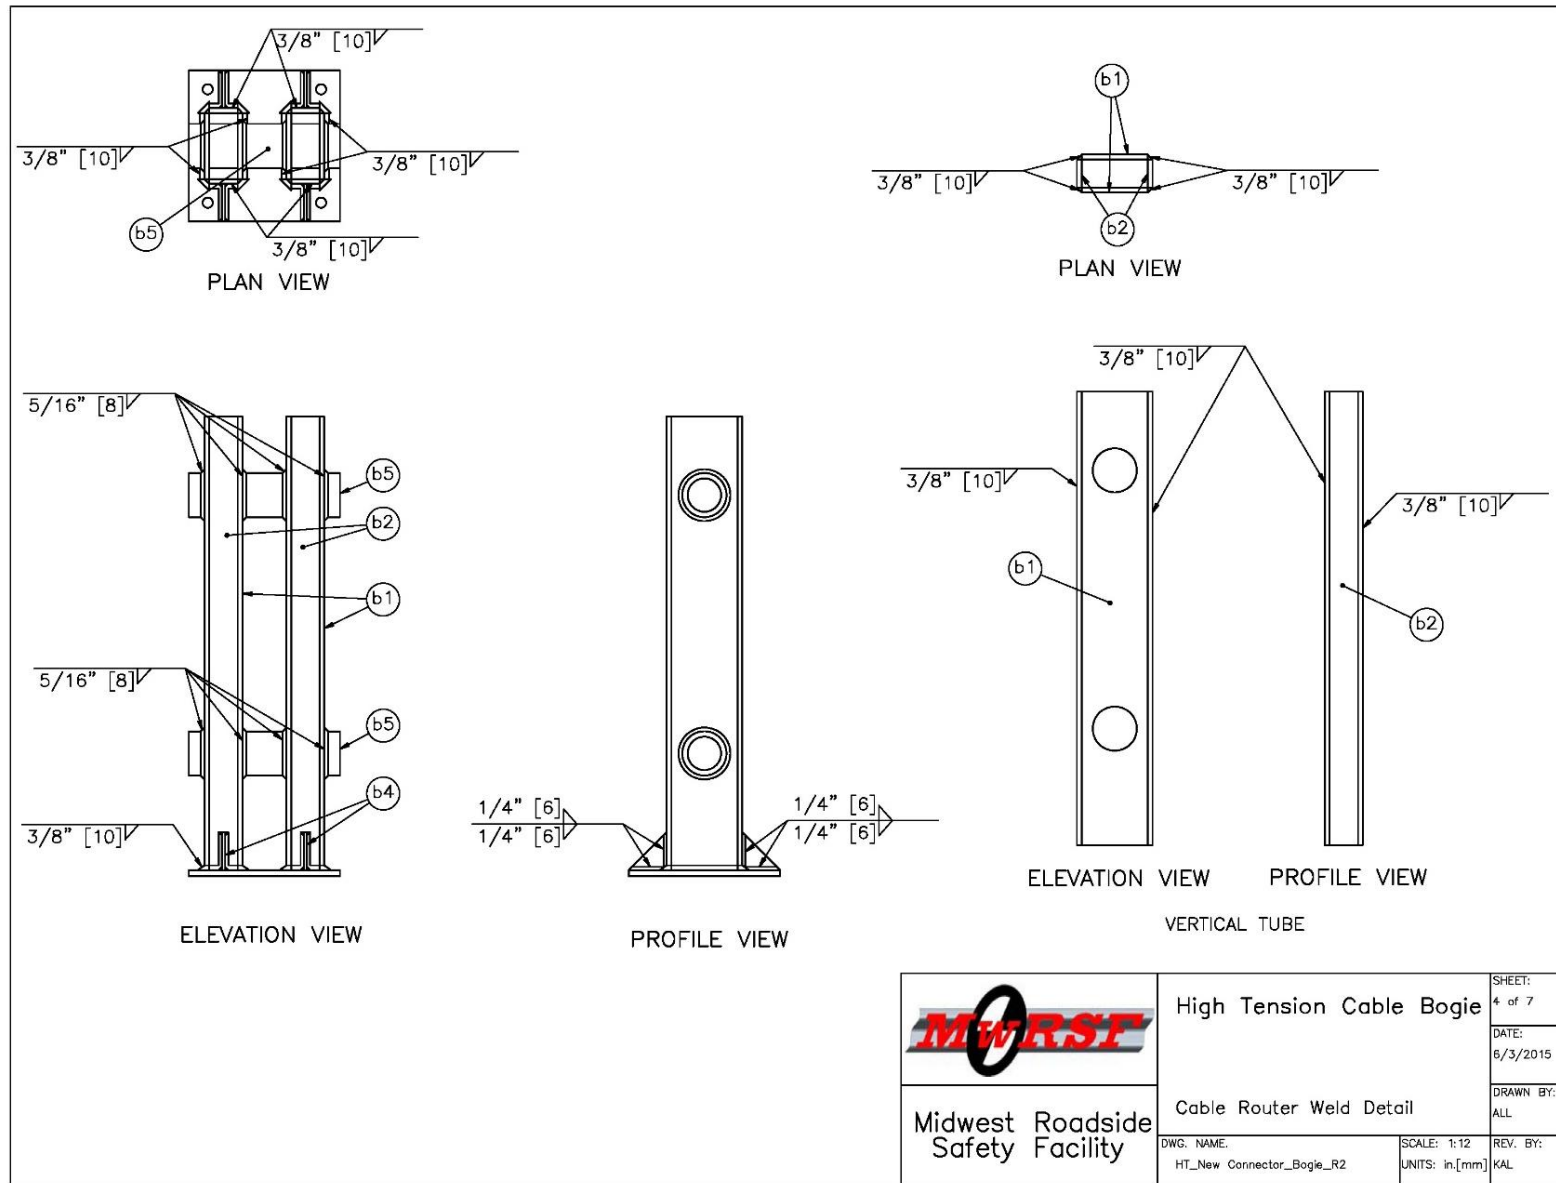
Cable Router Weld Detail, Test Nos. BBNC-1 through BBNC-3
